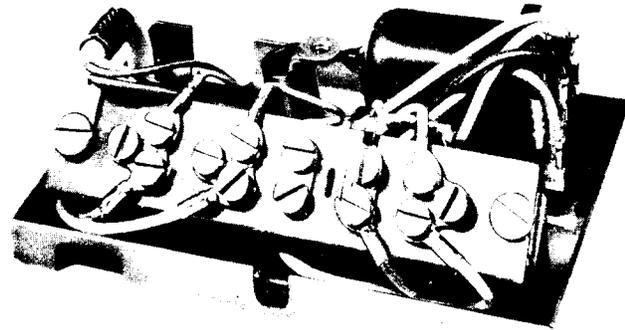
74-Type Connecting Block With New Cord Stay Arrangement and Screw-Mounted Terminal Strip
